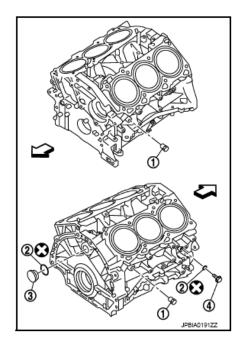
Identifying Drain Plugs Of Cylinder Block Courtesy of NISSAN MOTOR CO., U.S.A.
